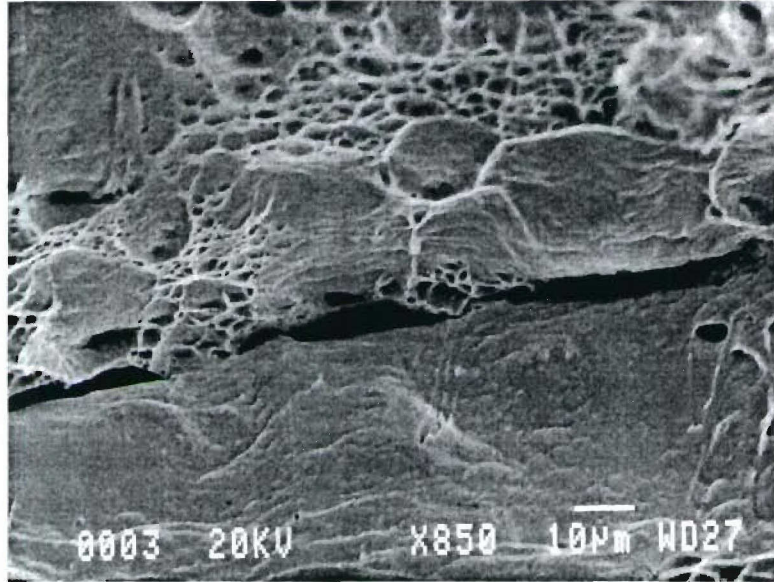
Presence of large interface voids in weld/HAZ tensile specimens machined from the NITRONIC-50 stainless steel welded plate P_A
